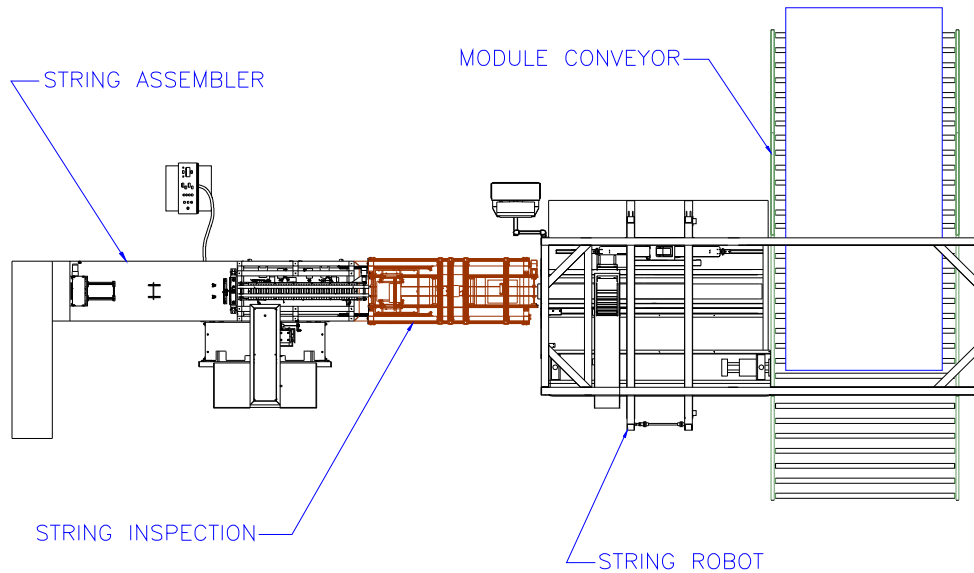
String inspection system integrated with string and module assembly (plan view).
